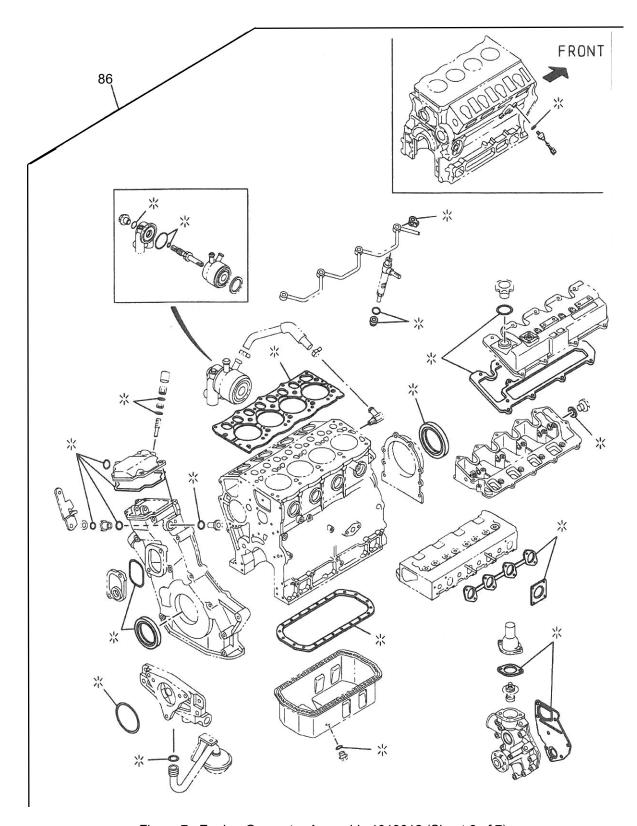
Engine-Generator Assembly 1013012 (Sheet 6 of 7).
